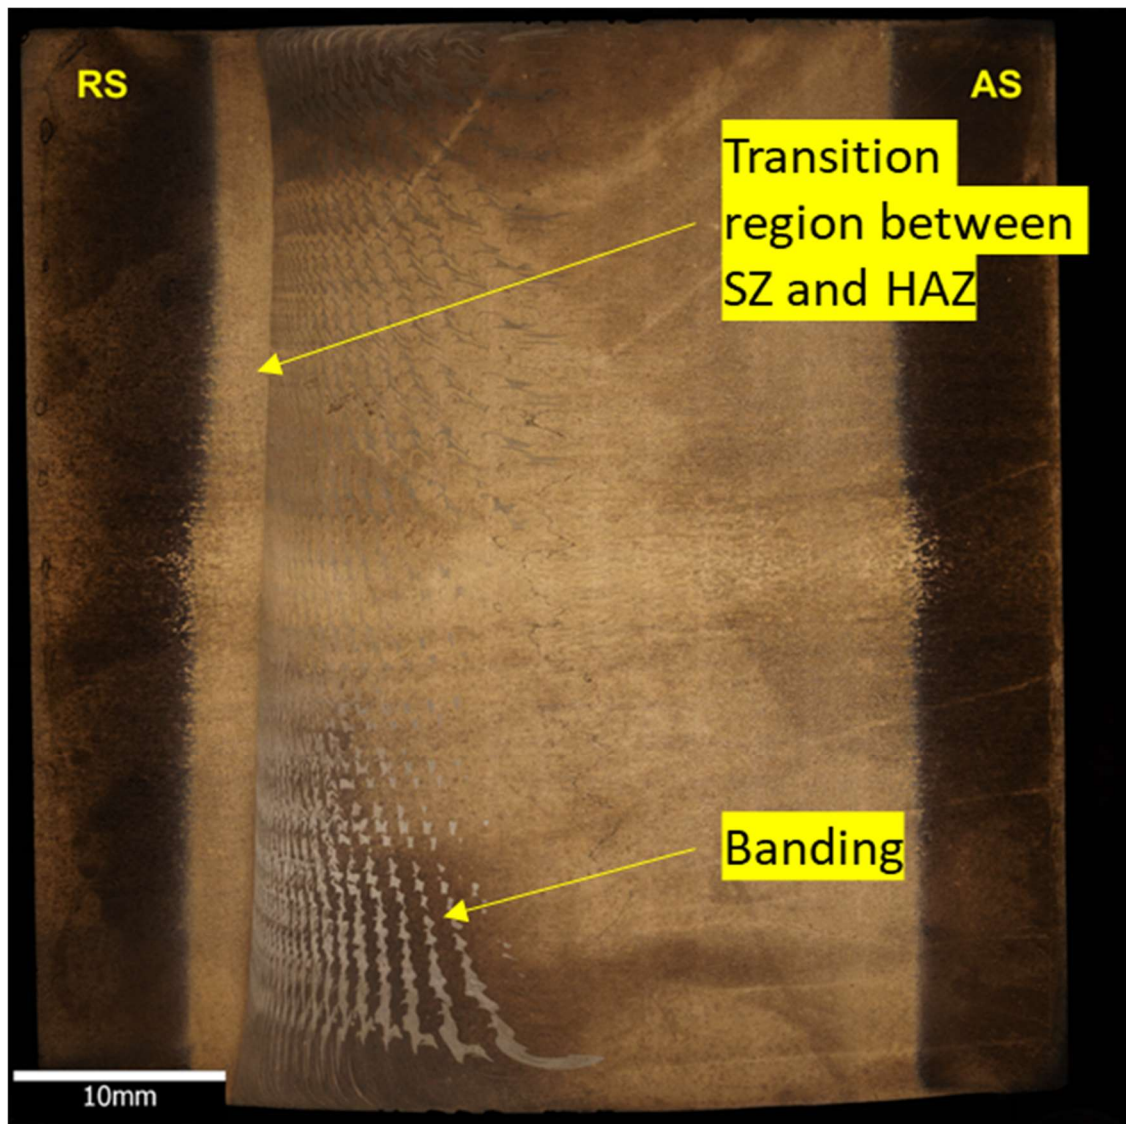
Macrograph of weld G14 - etched in Kellers reagent. Profile of the probe is visible and a transition between the SZ and the HAZ is identified on the retreating side. Banding is also identified within the stir zone.
